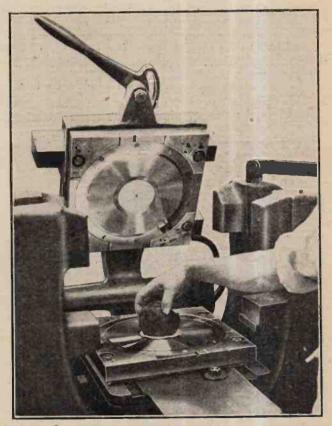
Hydraulic record press, showing top and bottom shells screwed to the dies, and a lump of plastic material being placed on the lower label prior to closing the press.
